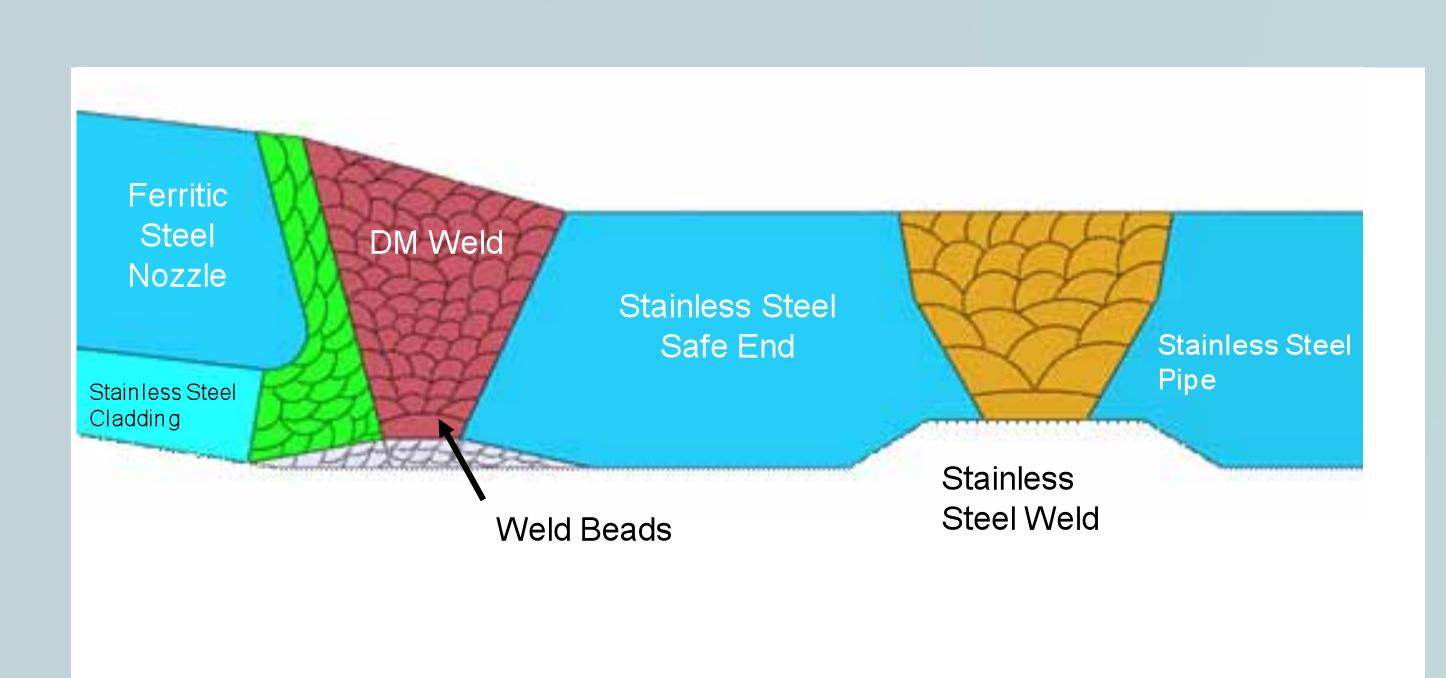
Cross-section of nozzle-to-pipe weld highlighting weld bead pattern
